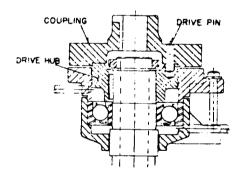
Self-Release Coupling Assembly in Hollow-Shaft Motors - Open Dripproof Only
